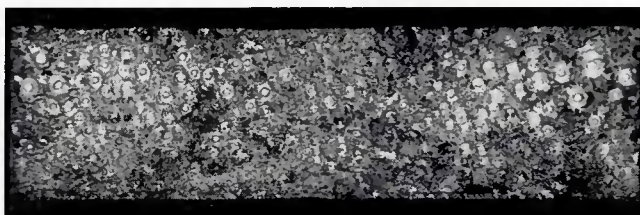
Massive and closely spaced acicular FeAl₃ on fracture surface of tension specimen with longitudinal weld (N465) (32X).
